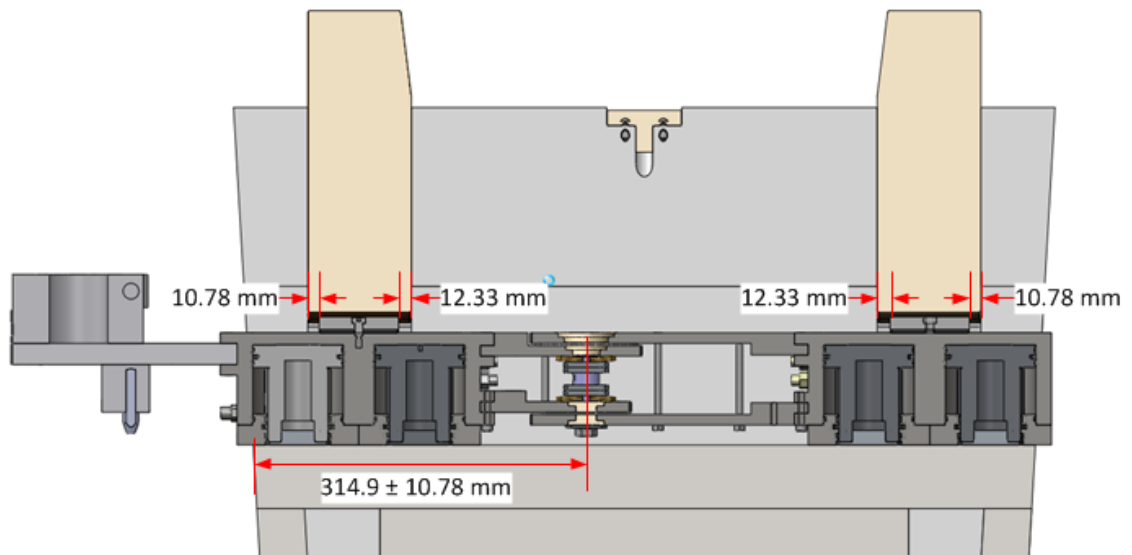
Improved mounting tolerance with modified pushing plates [18]
